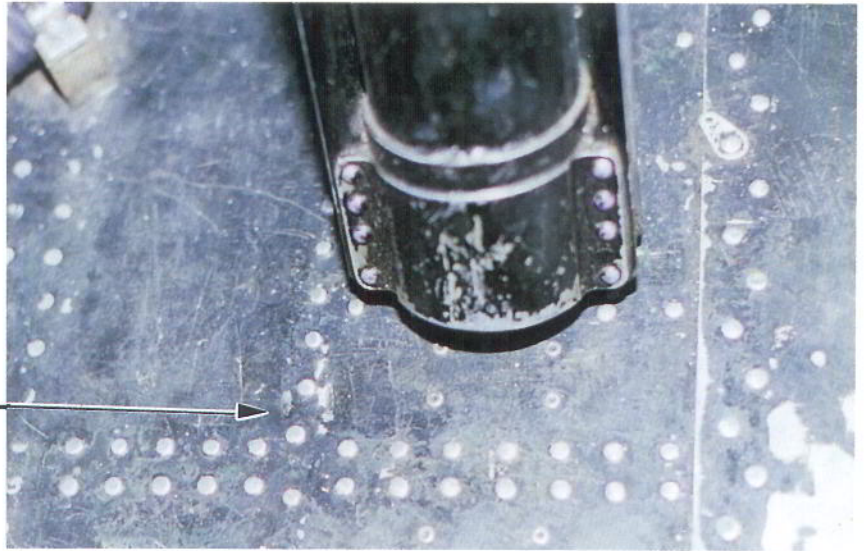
Dents on cockpit floor with leg restraint floor attachment fitting held beside it.
